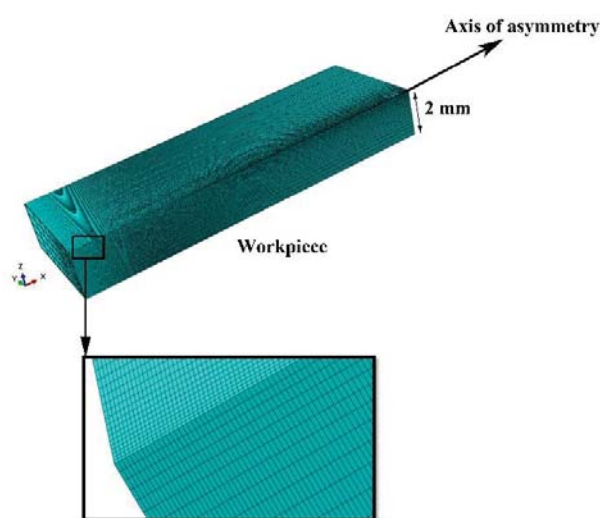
Mesh details of finite-element model concerning pulsed laser welding
